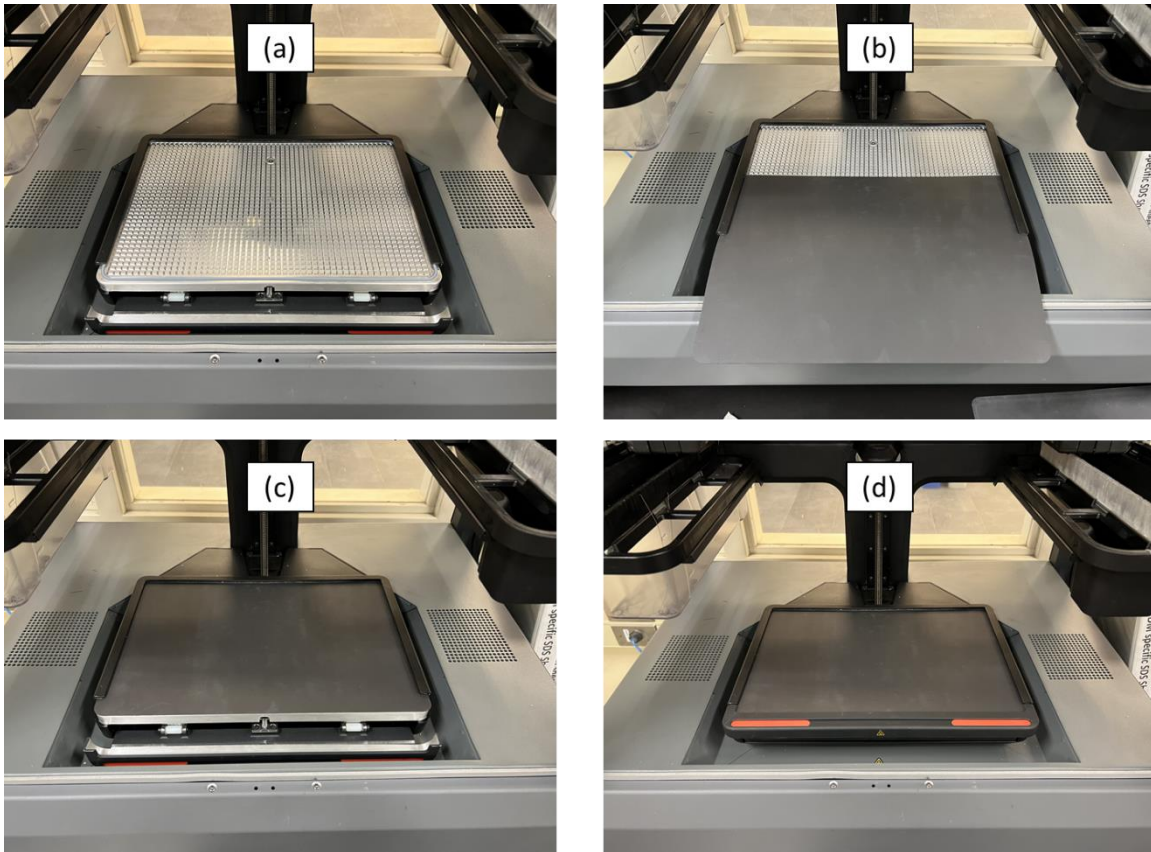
Print bed being loaded; (a) print bed without a print sheet, (b) with a sheet partially slid on, (c) with sheet fully slid on, and (d) with front latch in place
